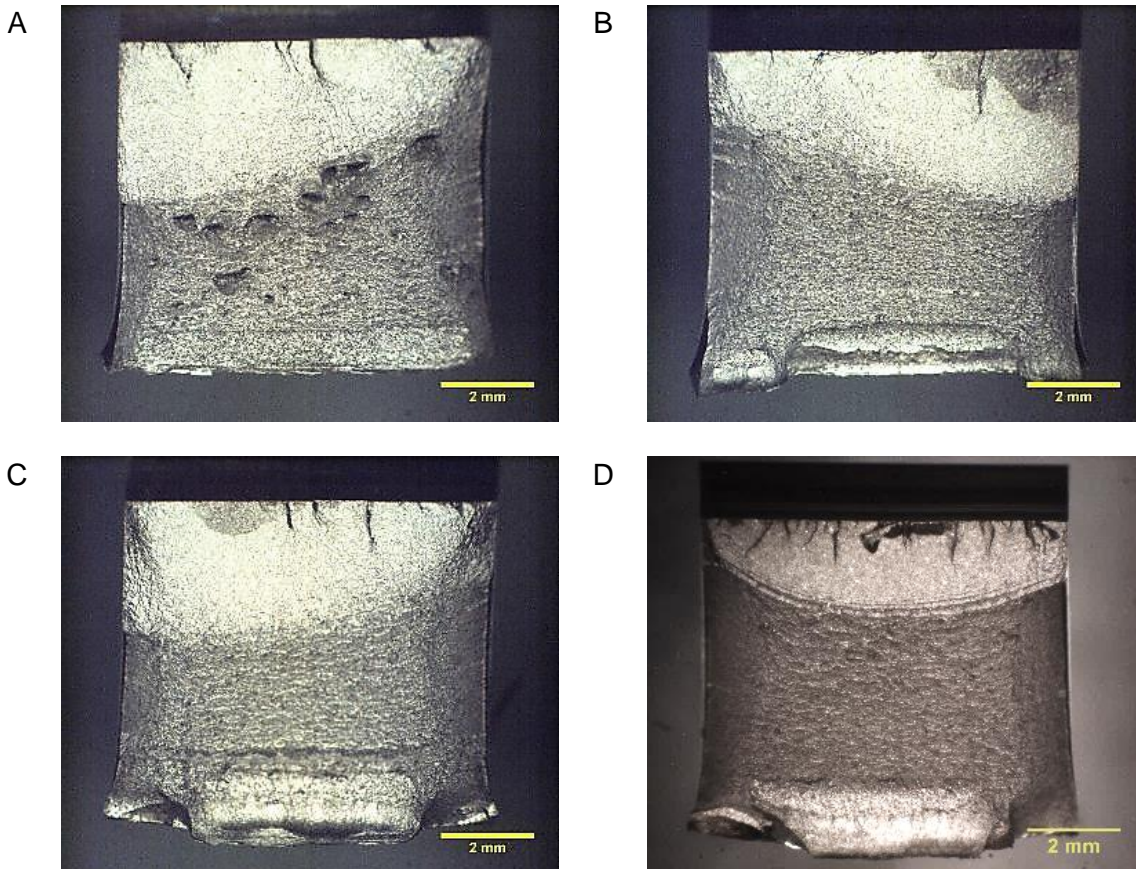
A) Fracture surface of CA short crack test on as-received notch surface, the fatigue region is uneven due to biased crack initiation and growth activity on side of the sample. B) CA short crack test with polished notch surface. C) OLR of 1.11 every 150 baseload cycles load condition. D) OLR of 1.56 every 150 baseload cycles load condition. Note the beachmarking near the end of life due to the overload cycles.
